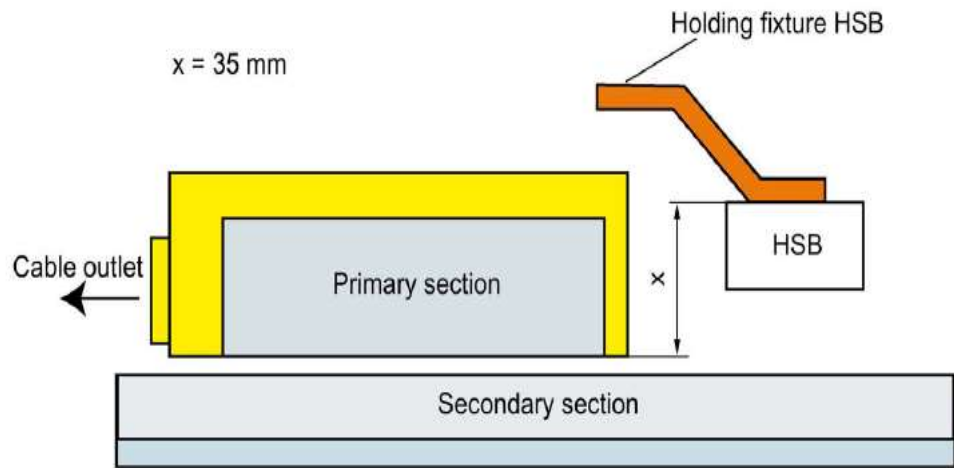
Specified dimension for mounting the Hall sensor box (HSB)
